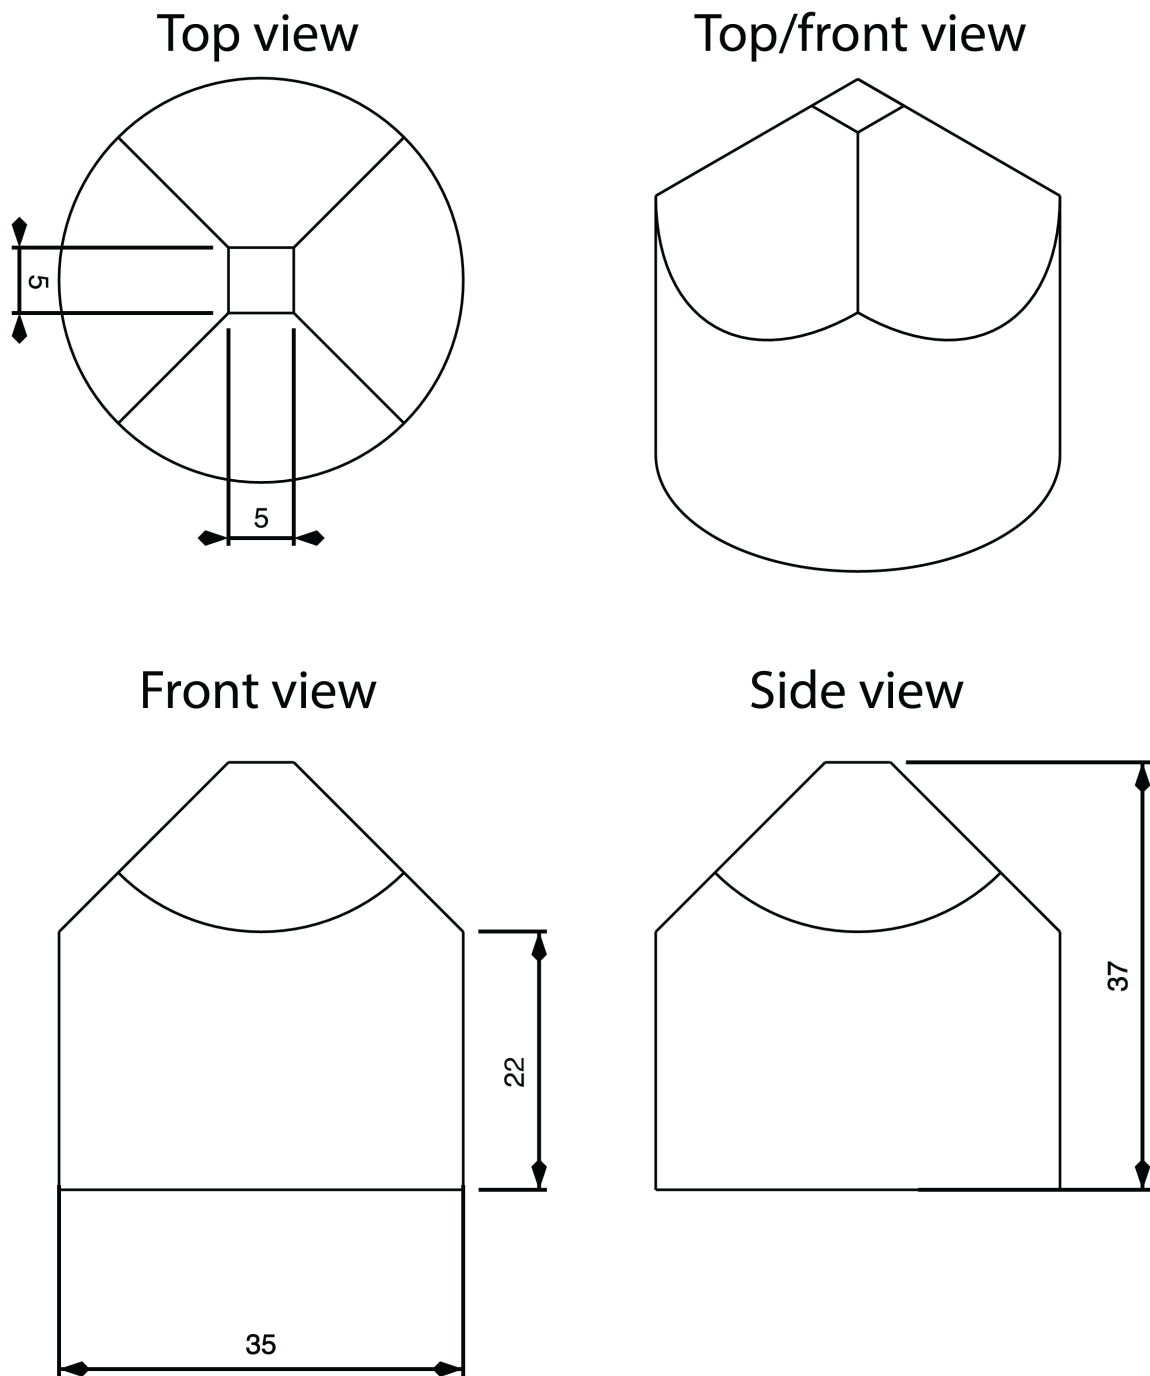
Dimensions of second-stage anvil with a 5 mm truncated edge length. Dimensions are in mm.
